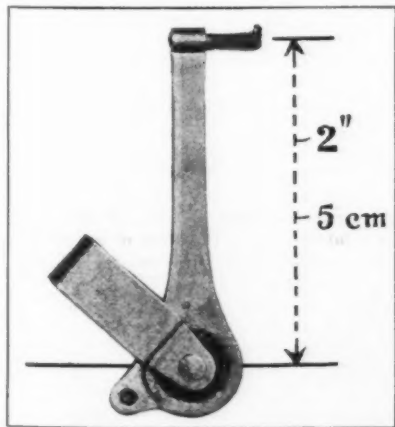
Typebar From Murray Automatic High-speed Printer. It is Exceptionally Short and has Ball Bearings.
